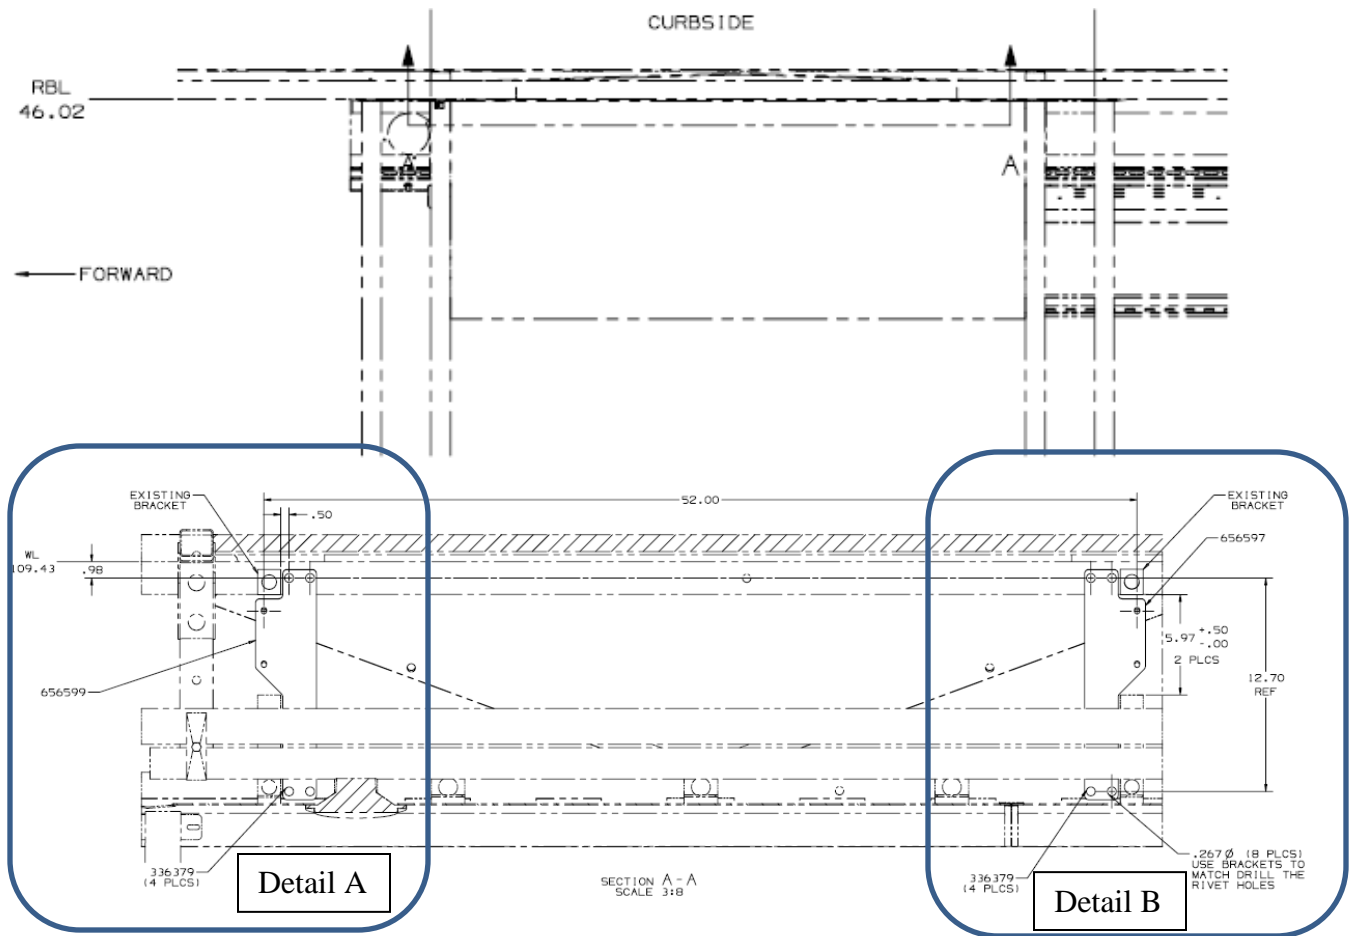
SHOWN VIEW TO CUT OFF SECTION OF THE ORIGINAL BRACKET TO INSTALL NEW BRACKET. DETAIL A & B WILL PROVIDE MORE DETAILS.
